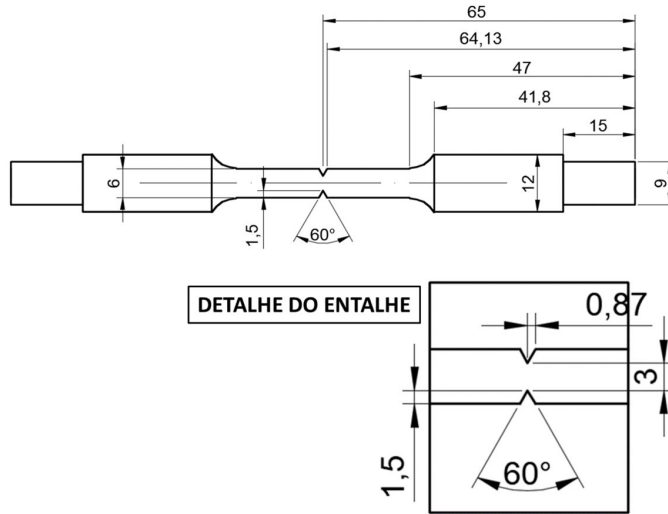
Bending specimen dimensions. All dimensions in millimeters.
